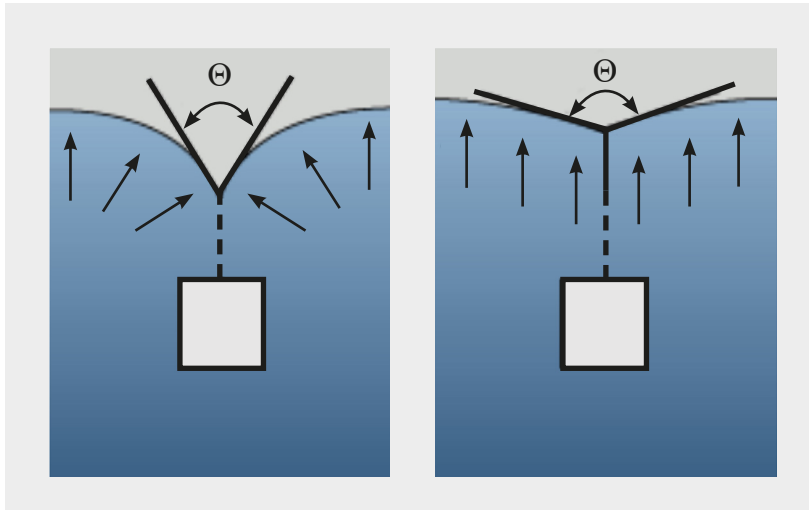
Internal weld line above an injection moulding tool inlet and characteristic superficial sink mark angle  $\Theta$  of two welded fill fronts (Image from [2])
